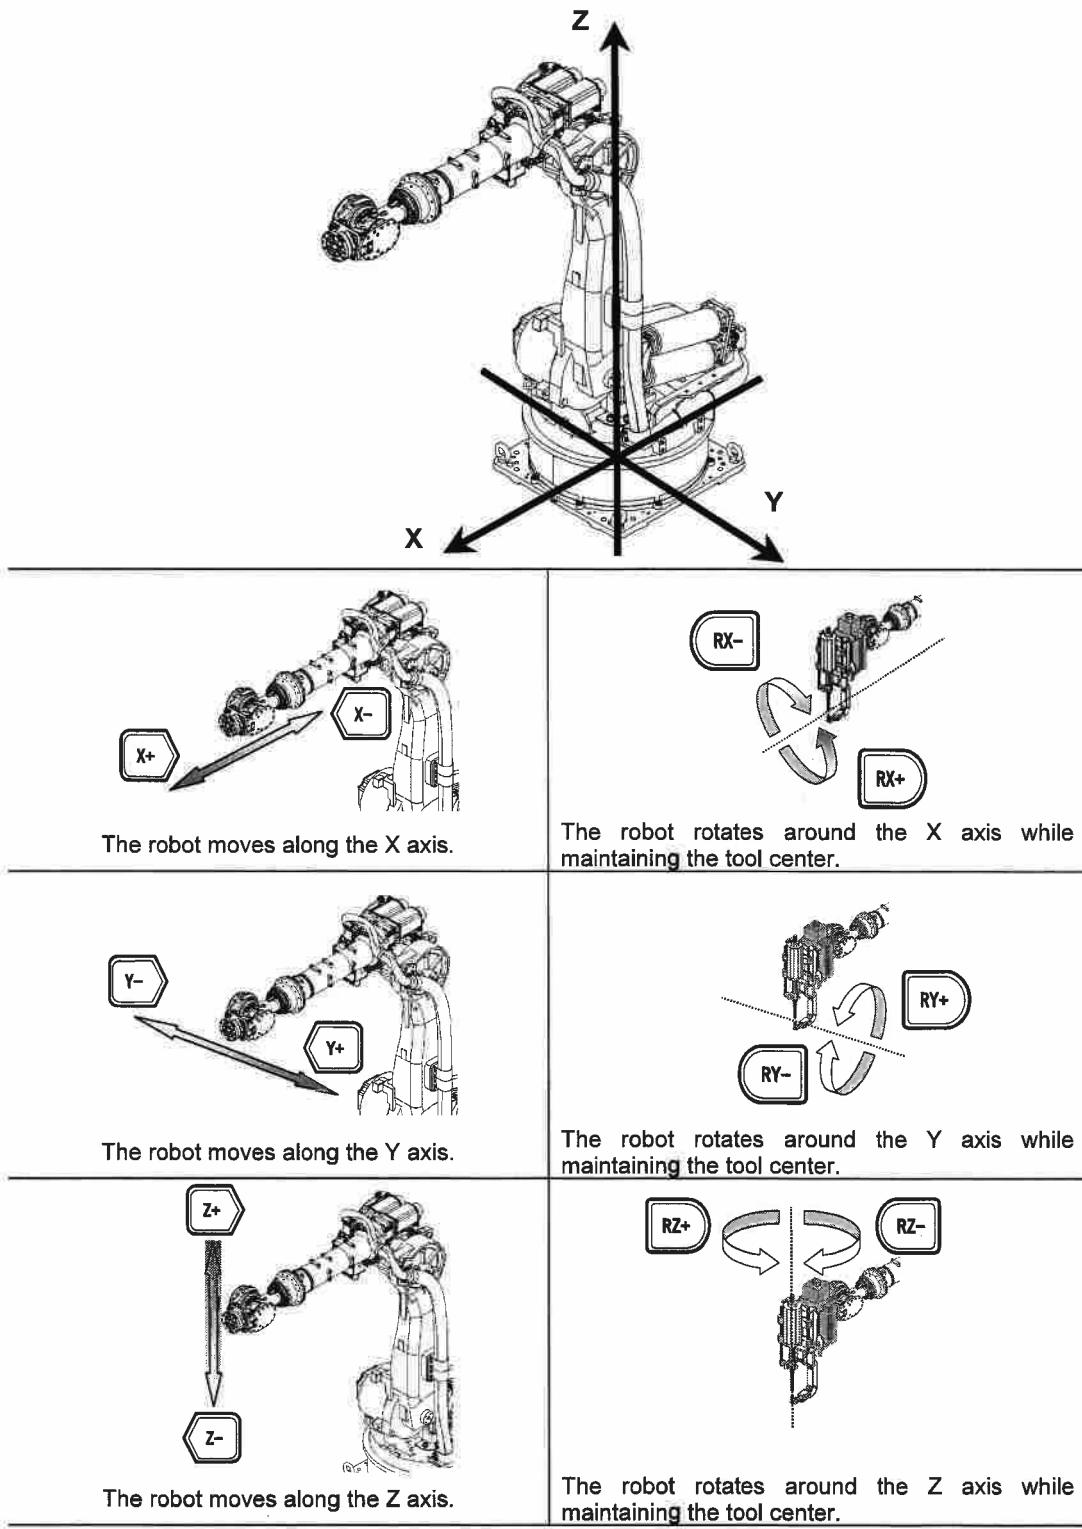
Movement directions in the machine coordinate system (for the spot welding application)
